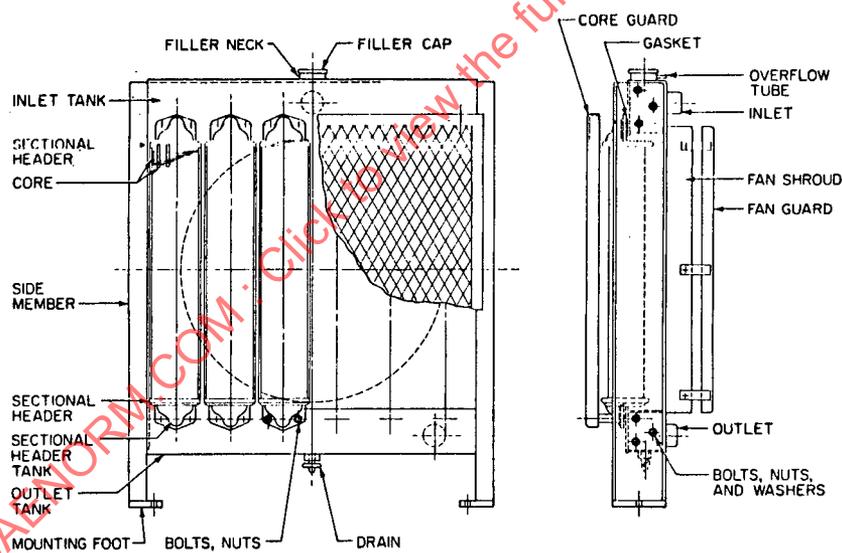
Cast or Fabricated Type (Sectional) Radiator
